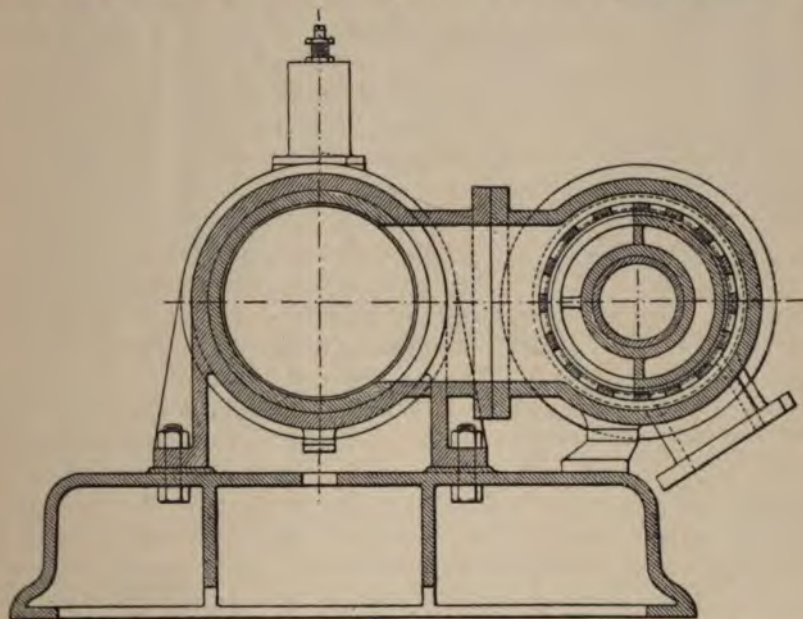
Bates' Engine: First Cylinder and Piston-valve. Cross Section. Scale 1/16th.
